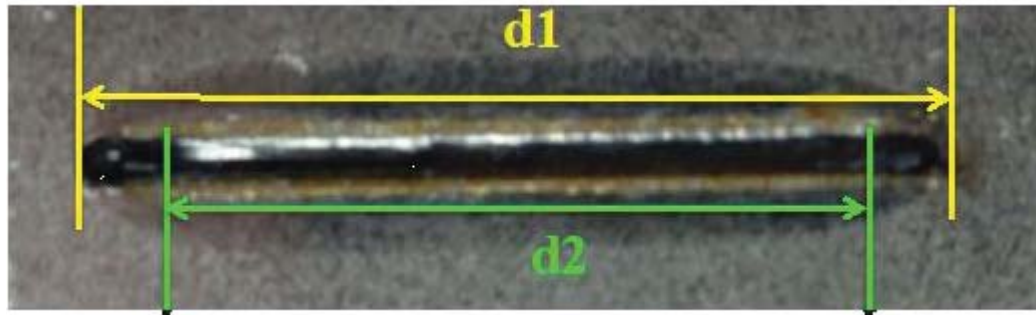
8 Full penetration mode of laser welding
